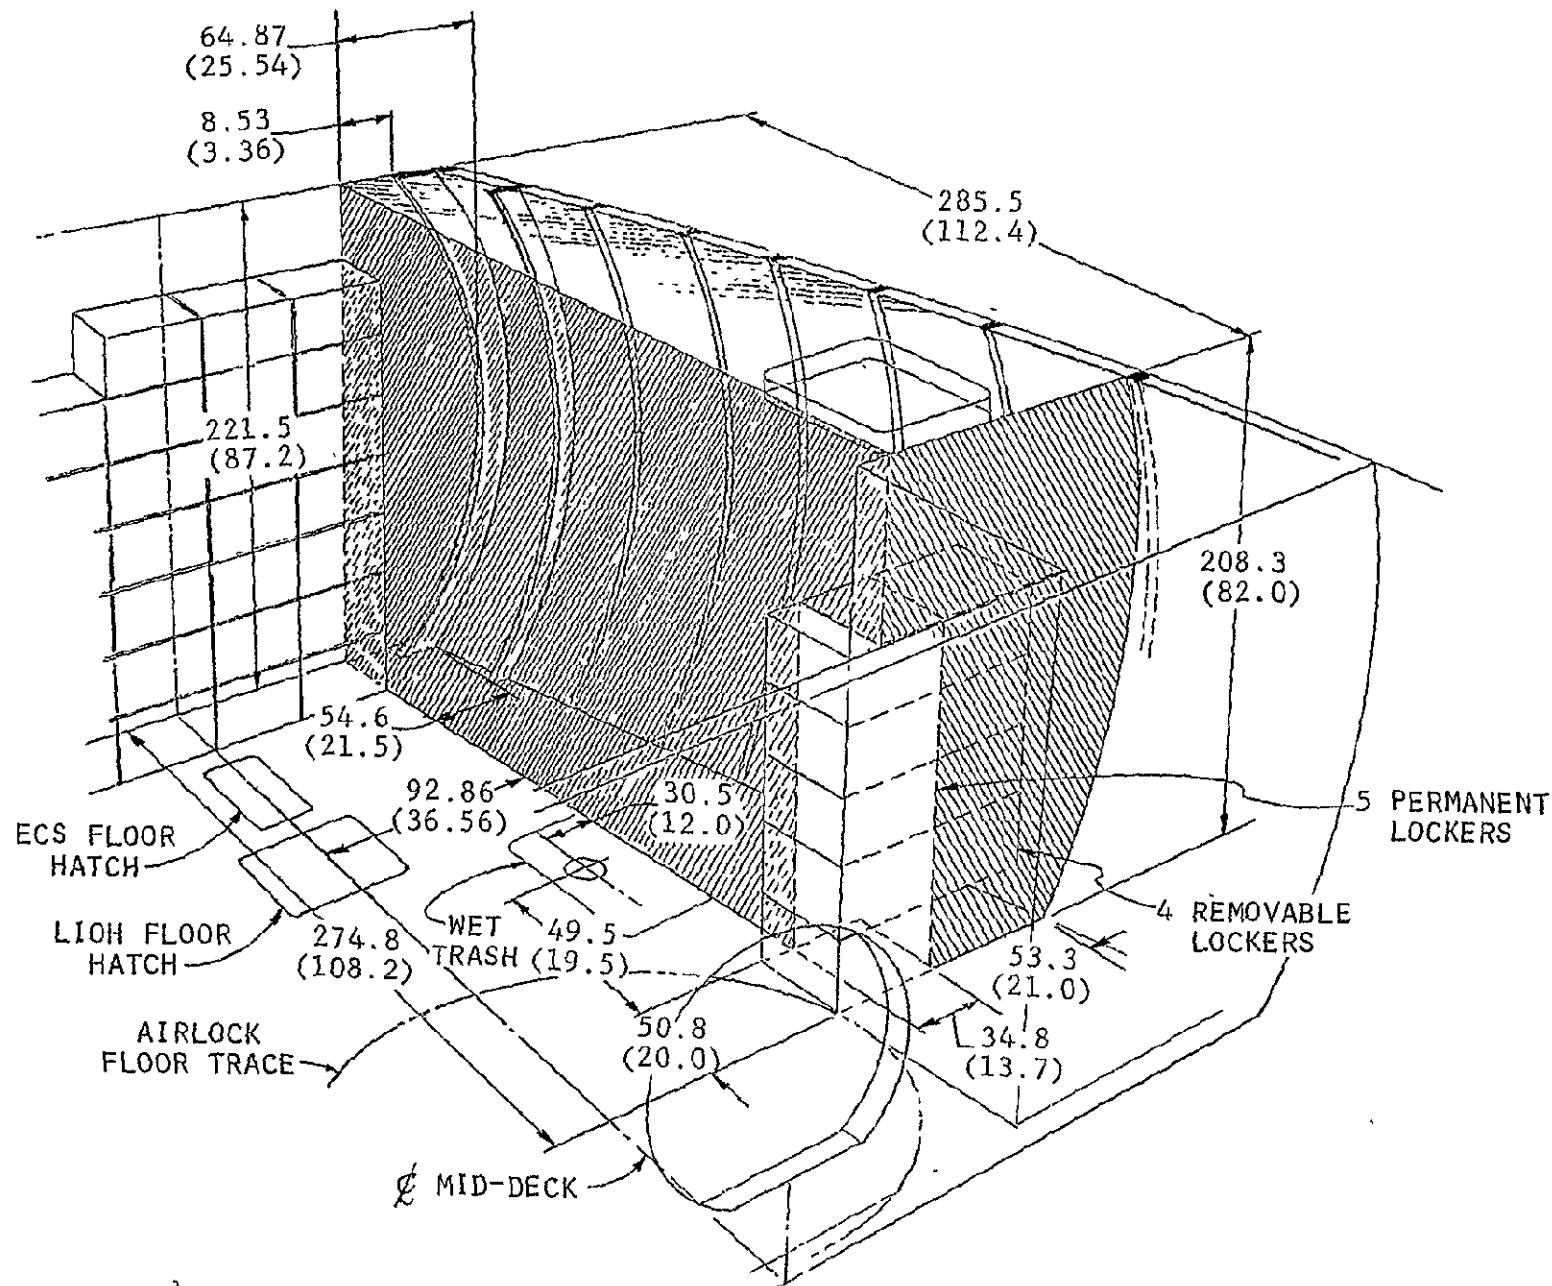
ORBITER MID-DECK RIGHT SIDE WALL AREA ALLOCATED FOR SLEEP STATIONS
